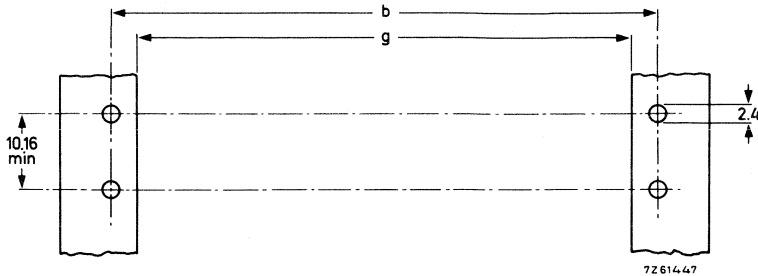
Rail mounting; for dimensions b and g, see Table 2.
